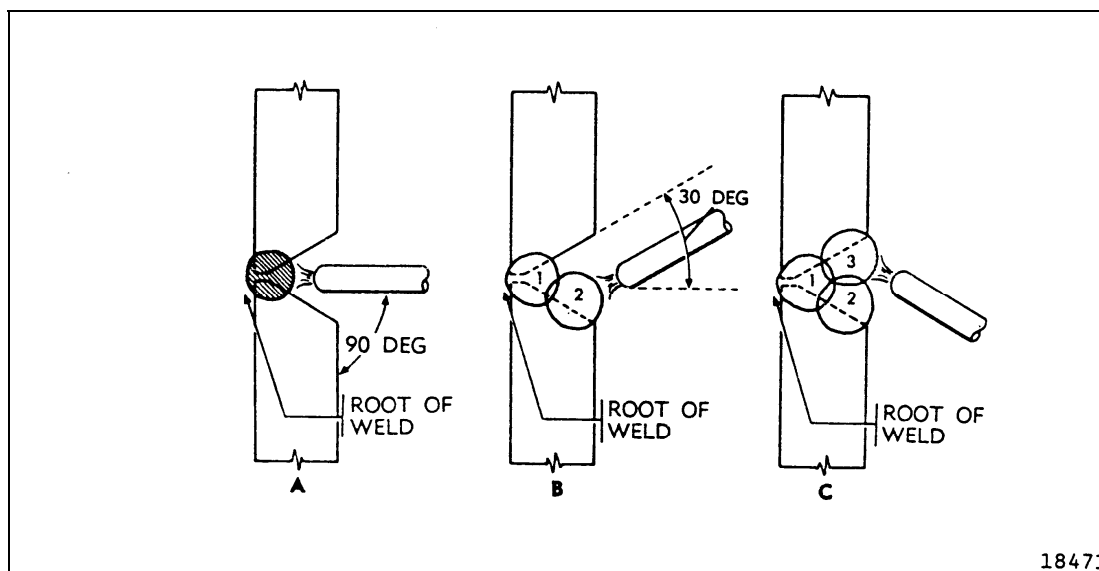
Welding Butt Joint on Vertical Plates
